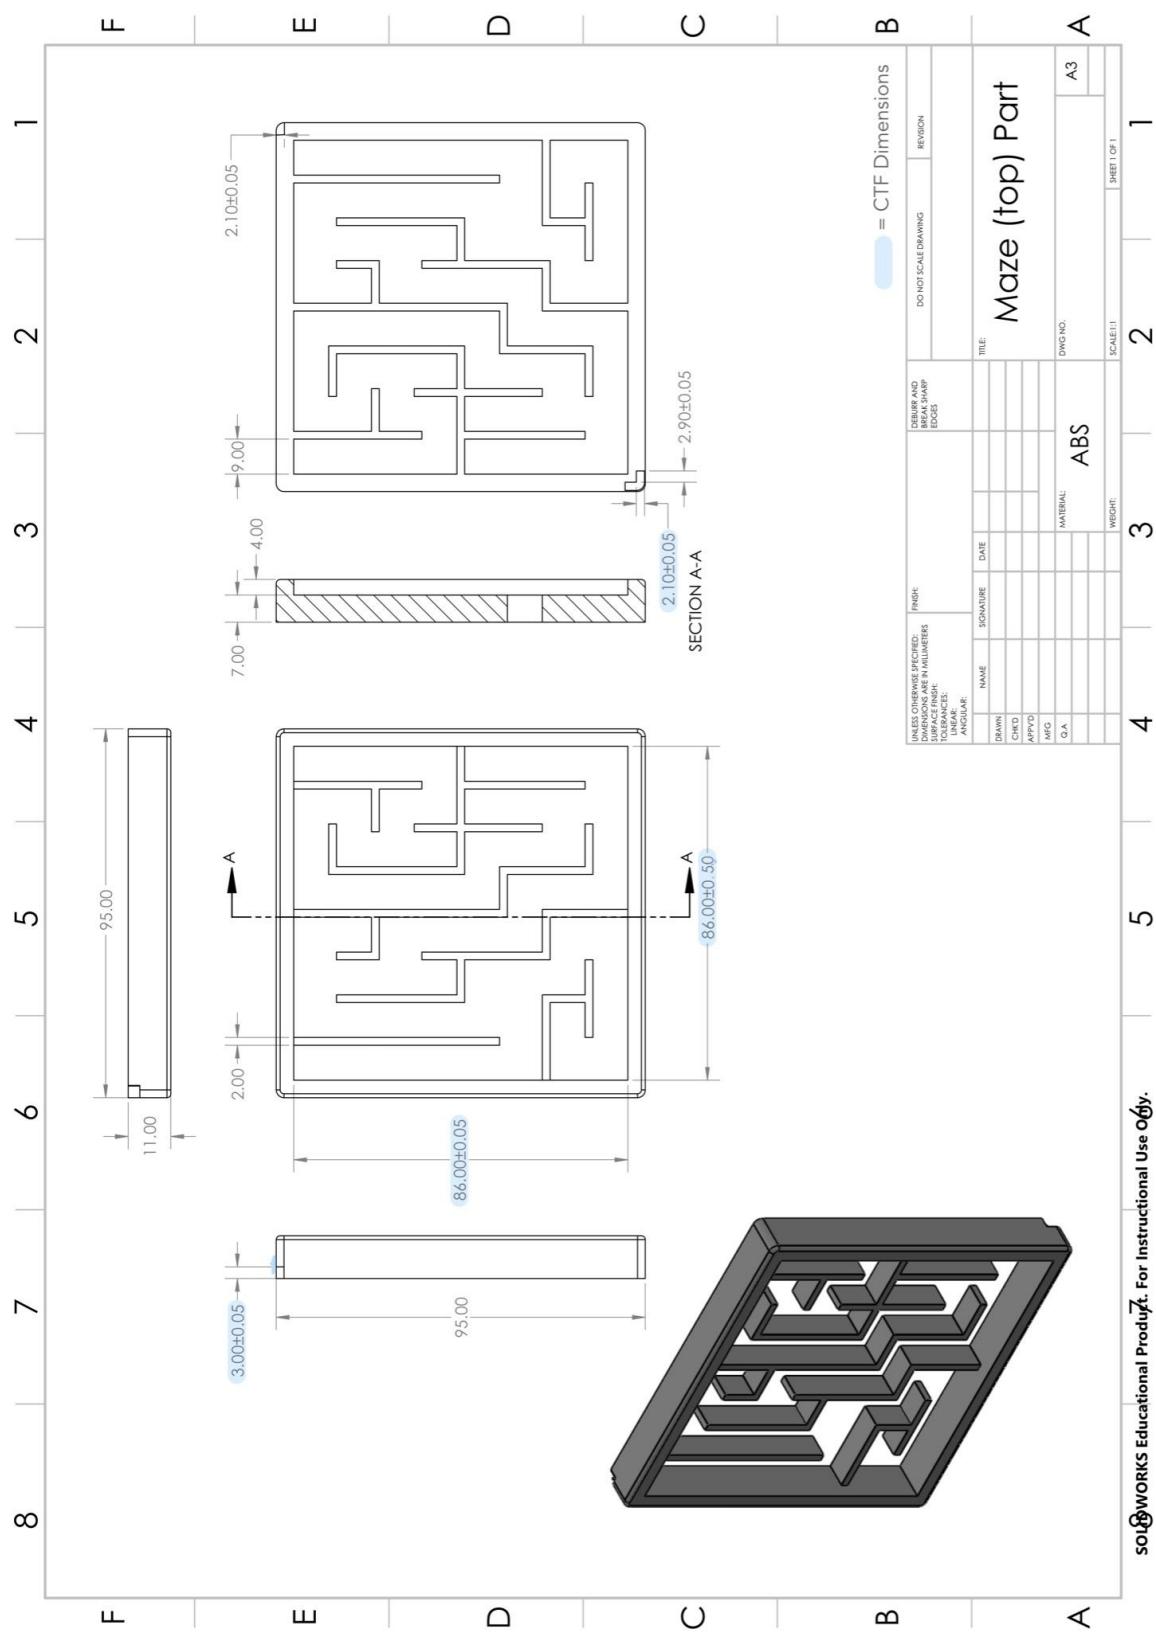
Dimensioned Drawing of Maze (top) Part with cross section view
